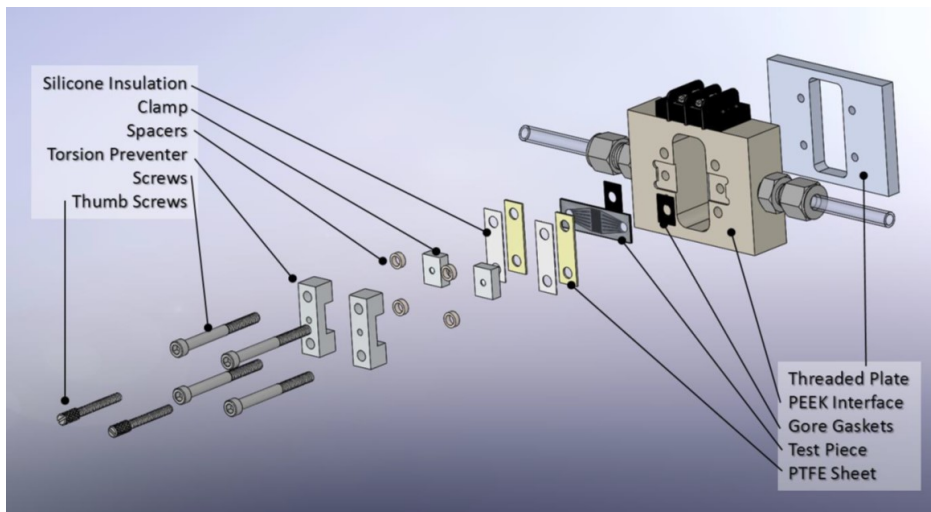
Solid model showing an exploded view of the test section being installed into the interface manifold
